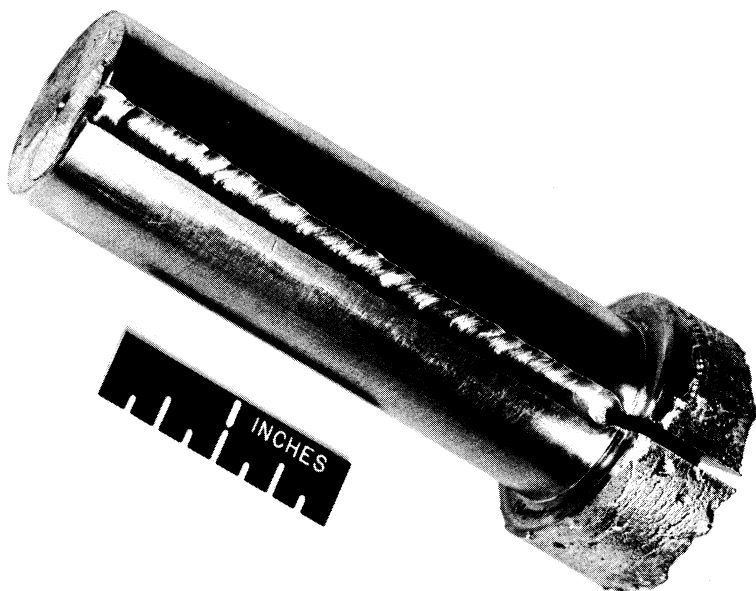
Weld in slot of vacuum-melted ingot.
